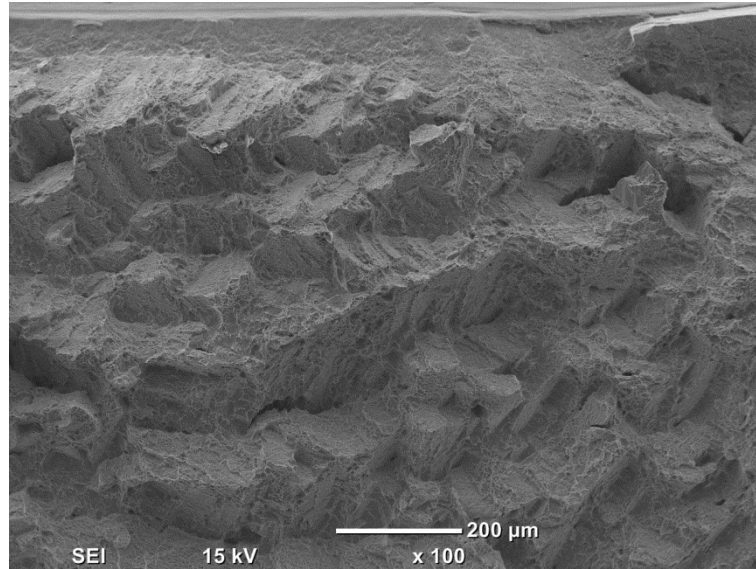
Fibrous fracture surface of Charpy impact sample from wrought plate.
